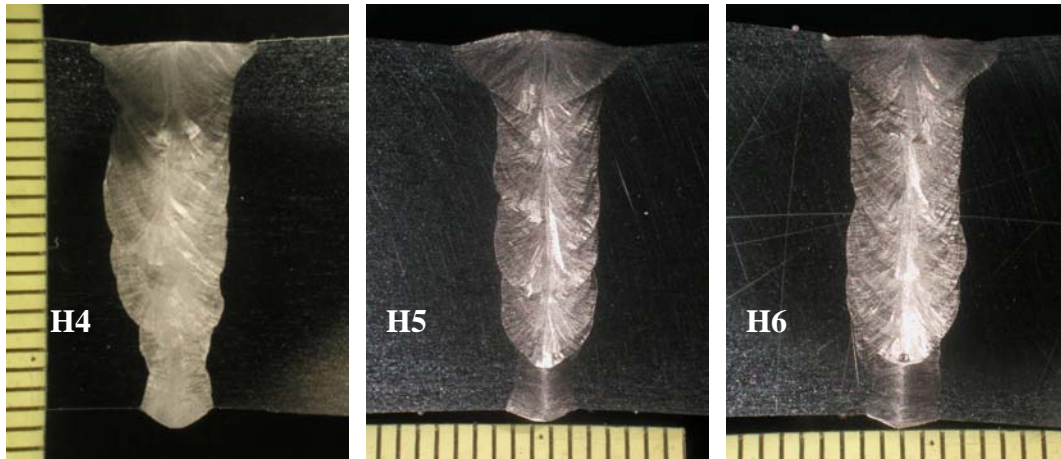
Welds from the test series B (from left to right): Weld H4, Weld H5 and Weld H6.
